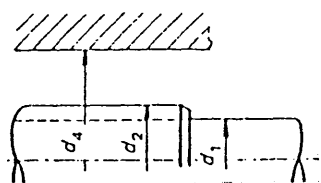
Balanced mechanical seal with or without short sleeve
